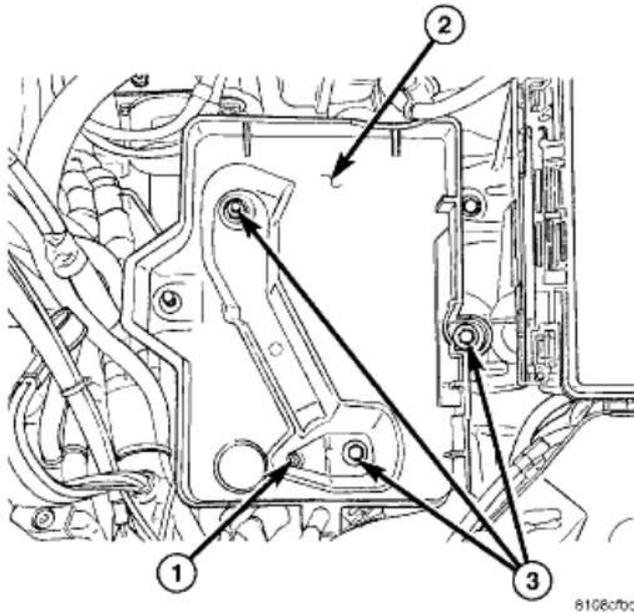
Removing/Installing Fluid Level Indicator/Tube Assembly
